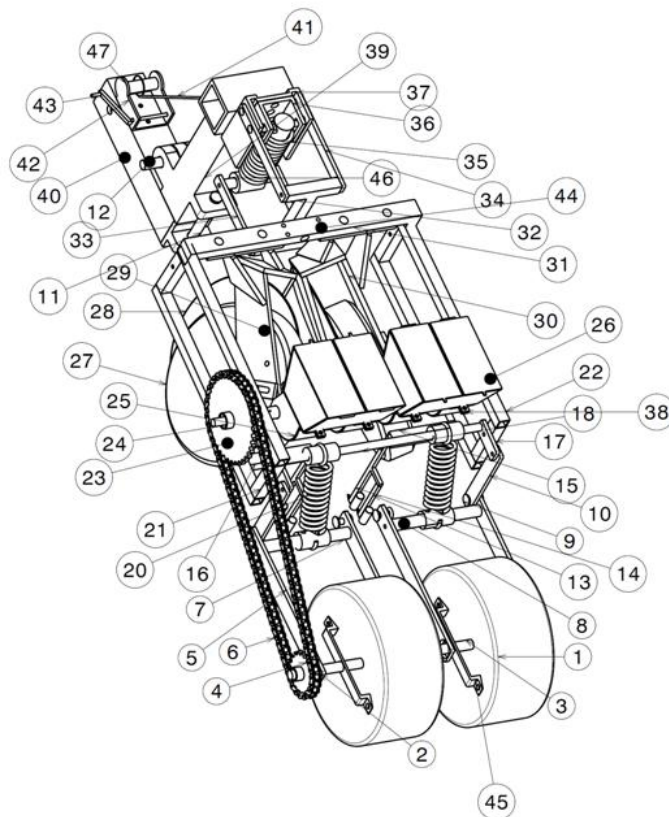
Detailed drawing of some of the seed drilling machine and parts
